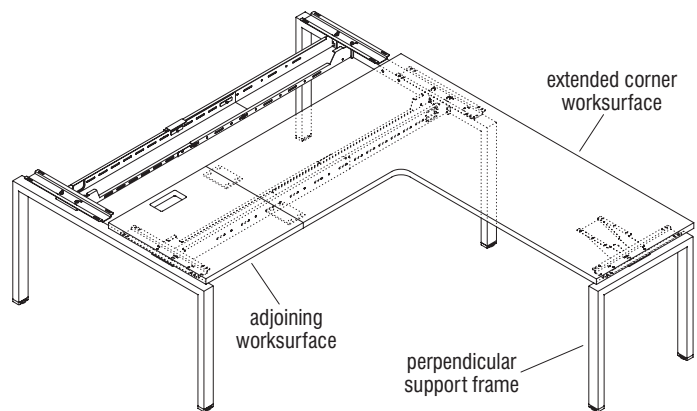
Dual-Sided Fixed, Extended Corner with Adjoining Worksurface
